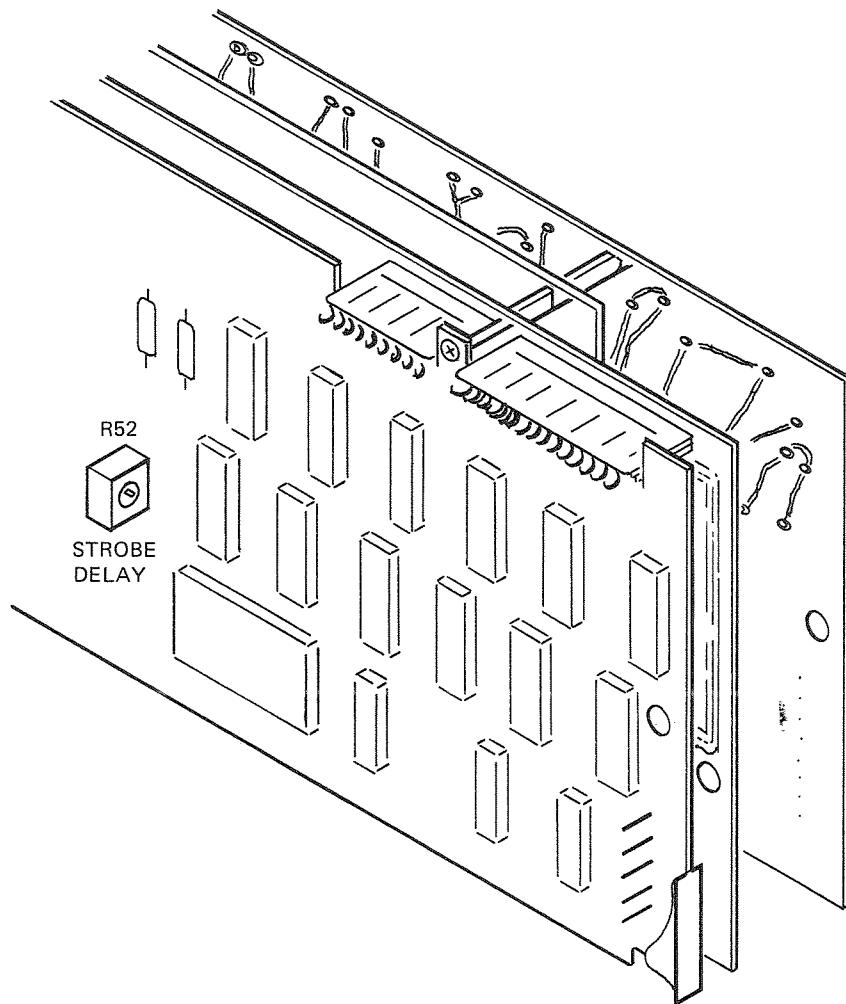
Location of STROBE DELAY (R52) adjustment on the Memory Controller & Address Driver board.
